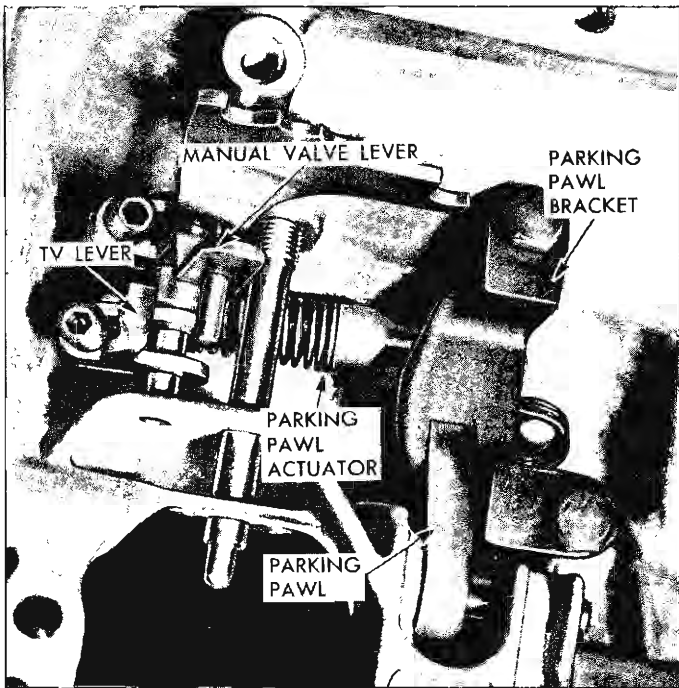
Inner Control Levers, Parking Pawl and Bracket
